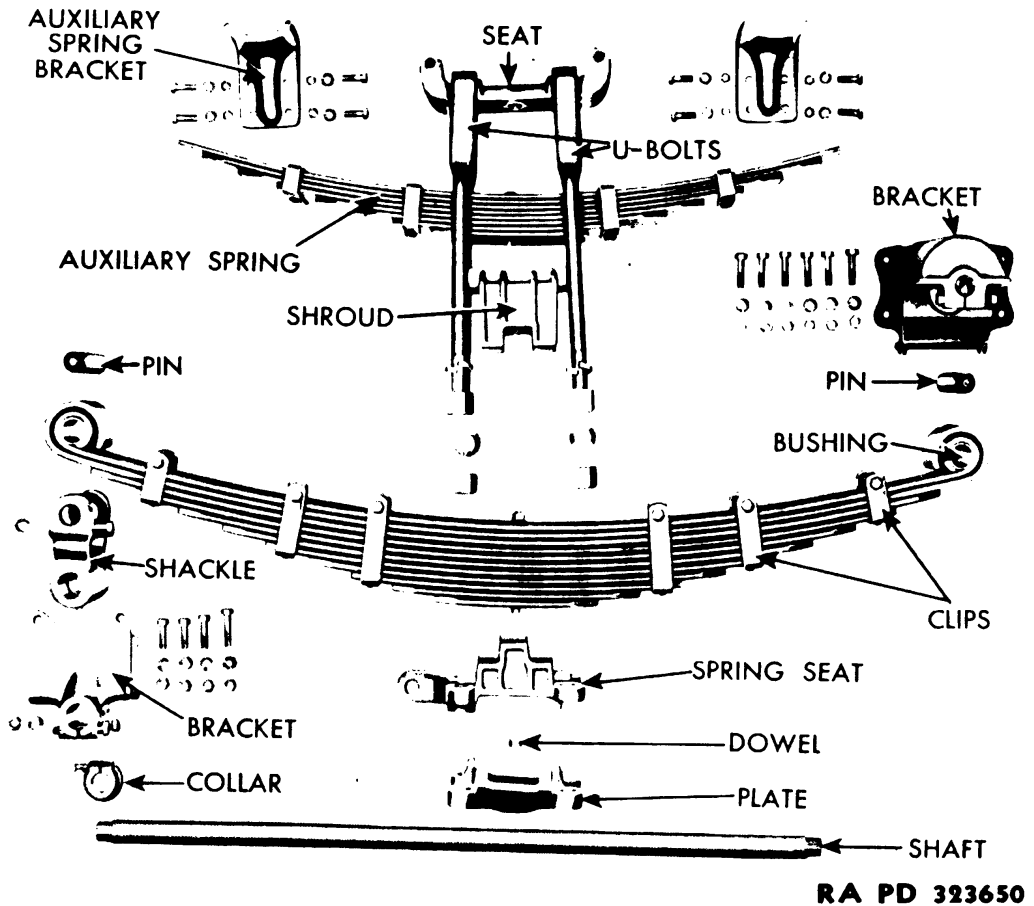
Rear Spring and Auxiliary Spring Disassembled
